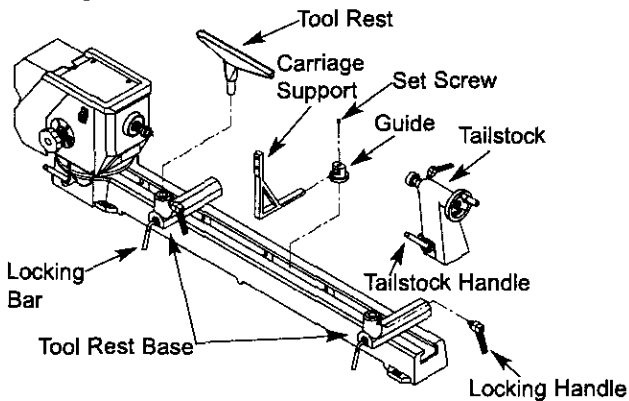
Attach Tool Rest Base to Lathe Bed (Model 24951)
